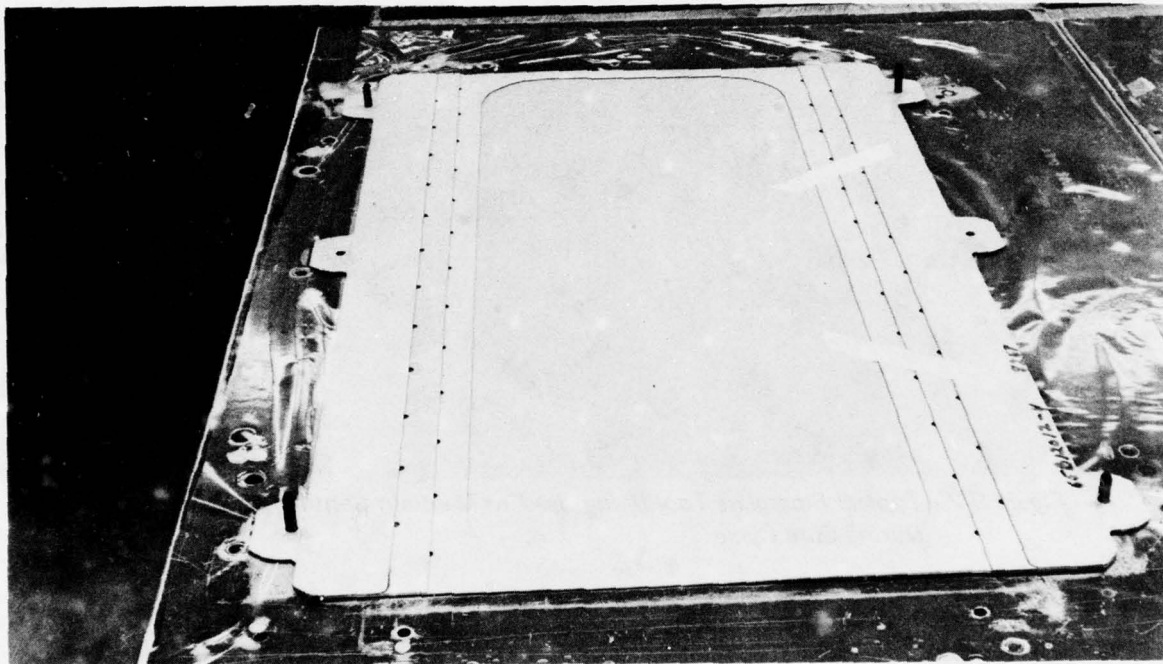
Flat Platen Tool With Skin Location Fixed With Pins
